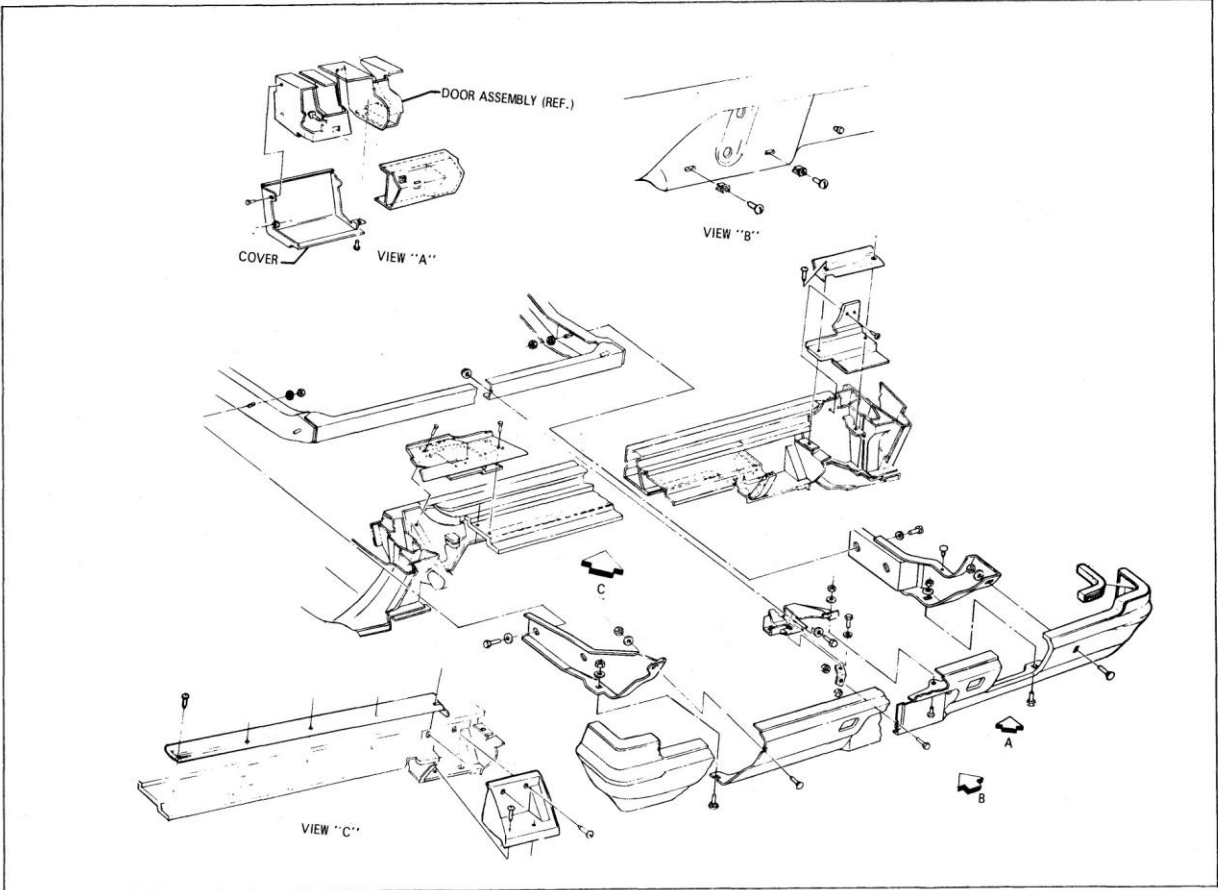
Tempest Station Wagon (With Dual Acting Tailgate) Rear Bumper Assembly
